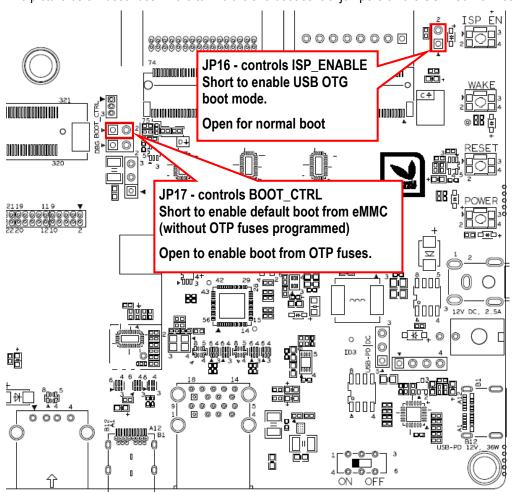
SOM Carrier Board rev A, Boot Control Jumpers
